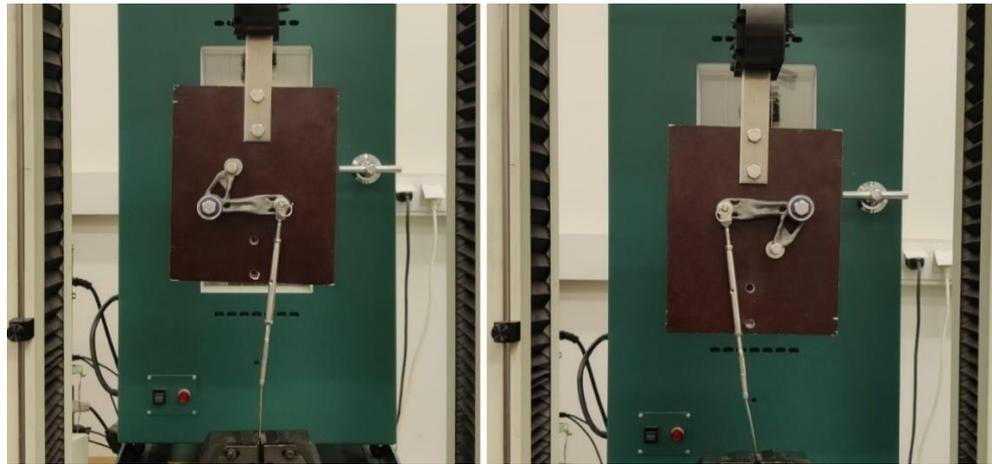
Tension (left) and compression (right) of manufactured part
